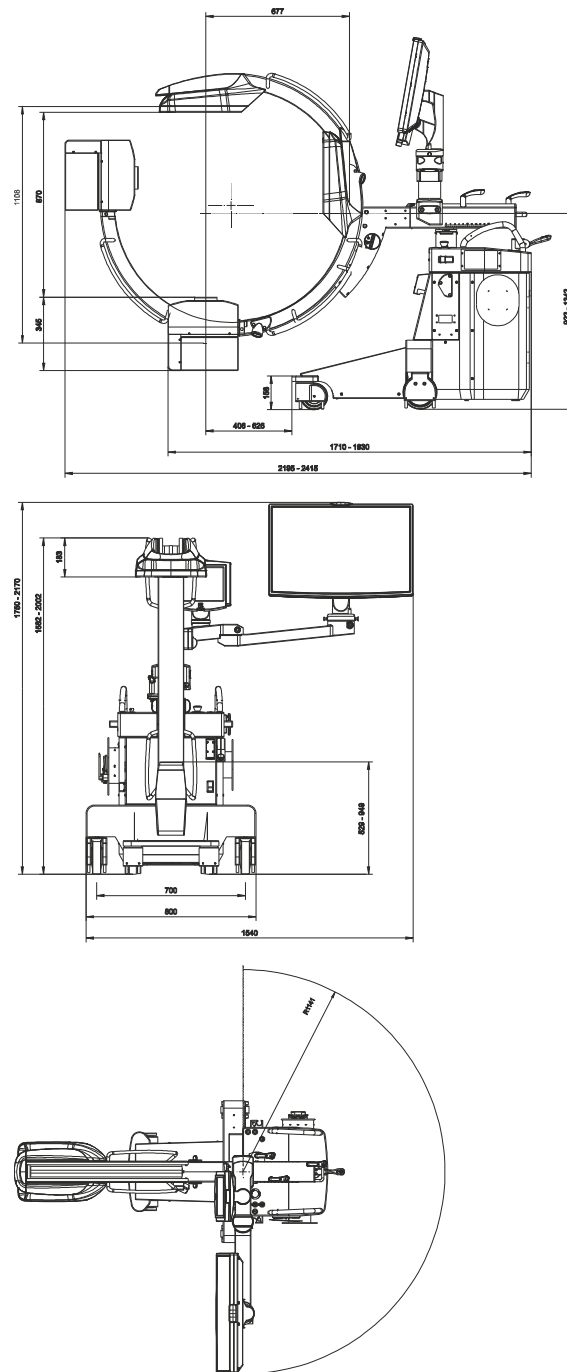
Dimensions of Ziehm Solo FD mobile stand
